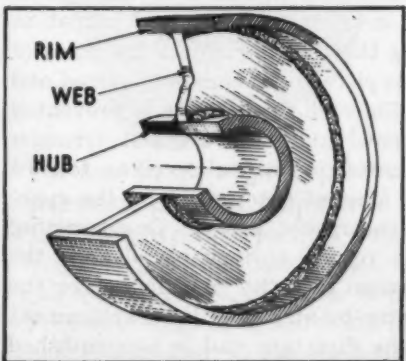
Alternate design. Hub is machined from tubing and rim is rolled from steel strip. Hub and rim are fillet welded to web.
